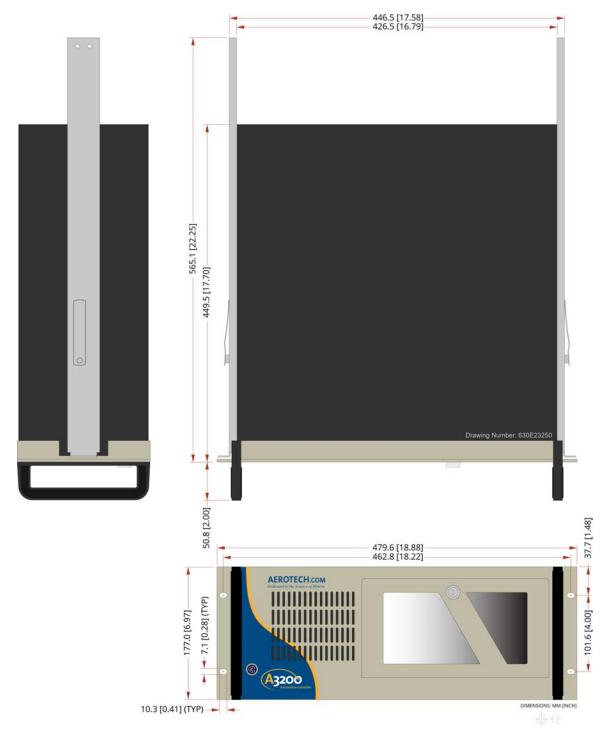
4U Rack Mount Chassis with Slides Dimensions (-R401)
